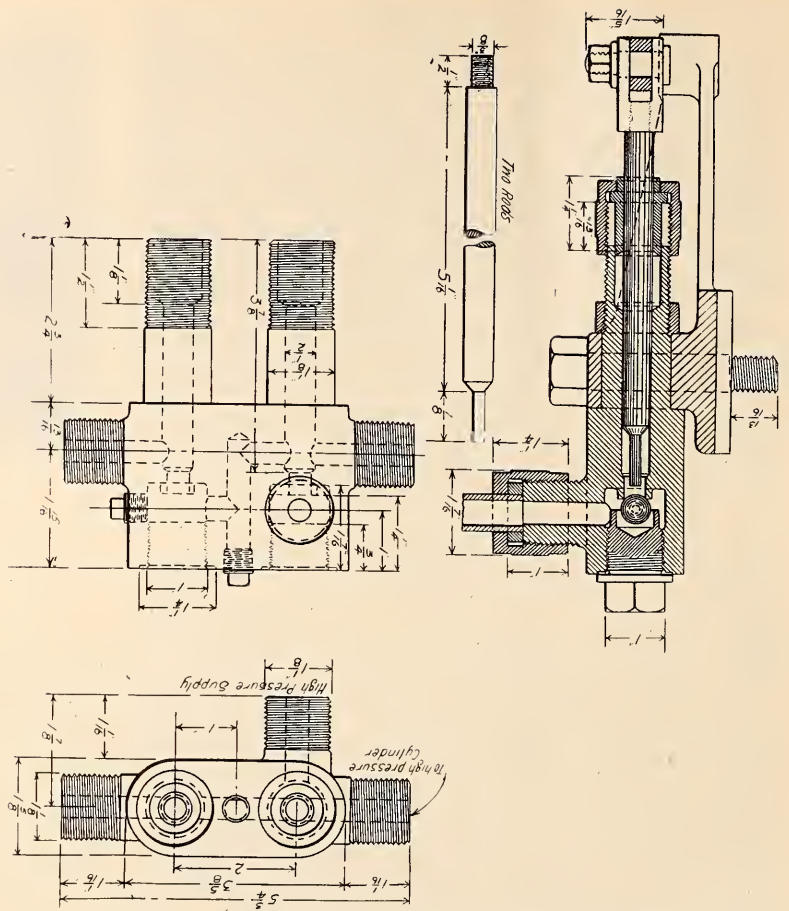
DETAILS OF CONTROLLING VALVE, HYDRAULIC DRIVING BRASS PRESS—L. S. & M. S. RY.
